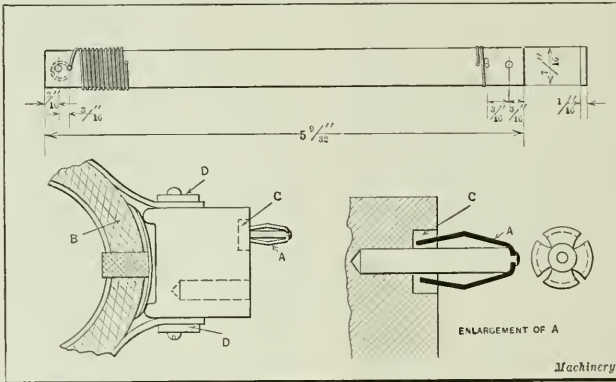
(Above) Fiber Strip for Rheostat Coil Winding; (Below) Honeycomb Coil and Enlargement of its Spring Contact "Plug-in"
